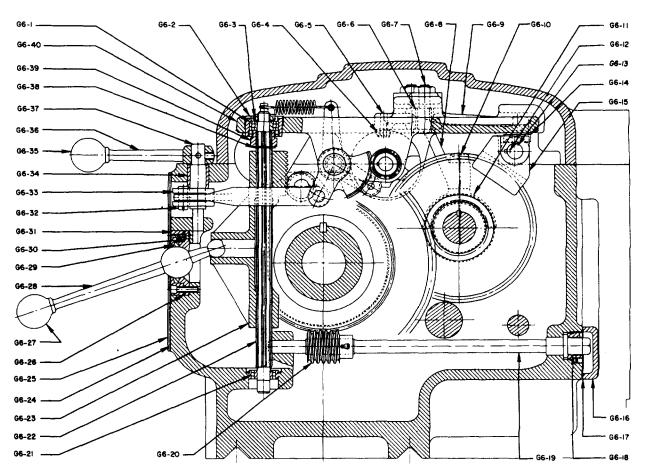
Headstock Gear Shifting-18-27 Speeds
